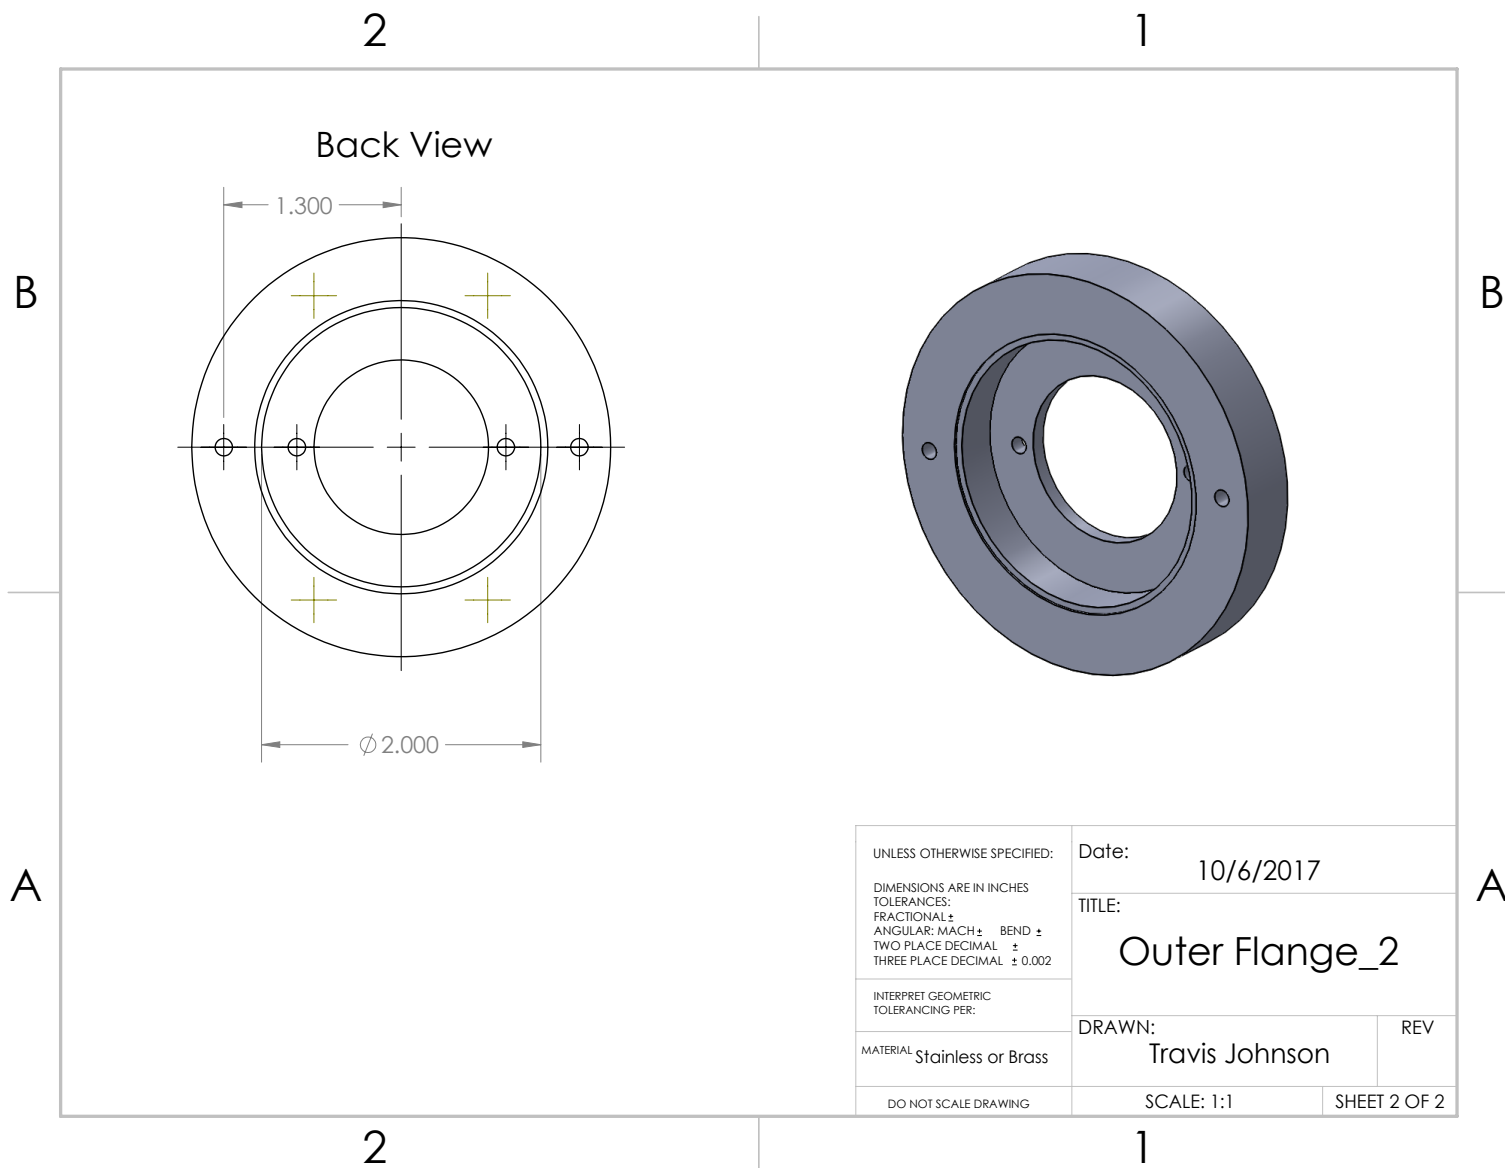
Page 2 detailing the second piece of the three piece flange. Image taken from SolidWorks®.
